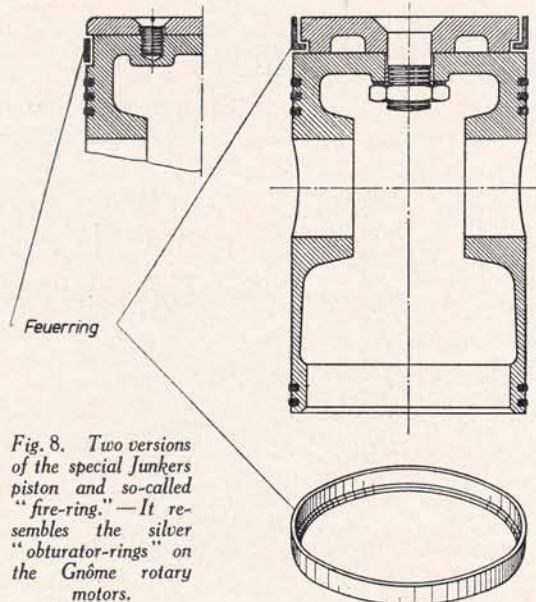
Two versions of the special Junkers piston and so-called "fire-ring."—It resembles the silver "obturator-rings" on the Gnôme rotary motors.
